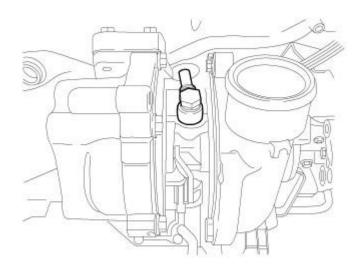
Turbocharger Feed Line Courtesy of CHRYSLER LLC
